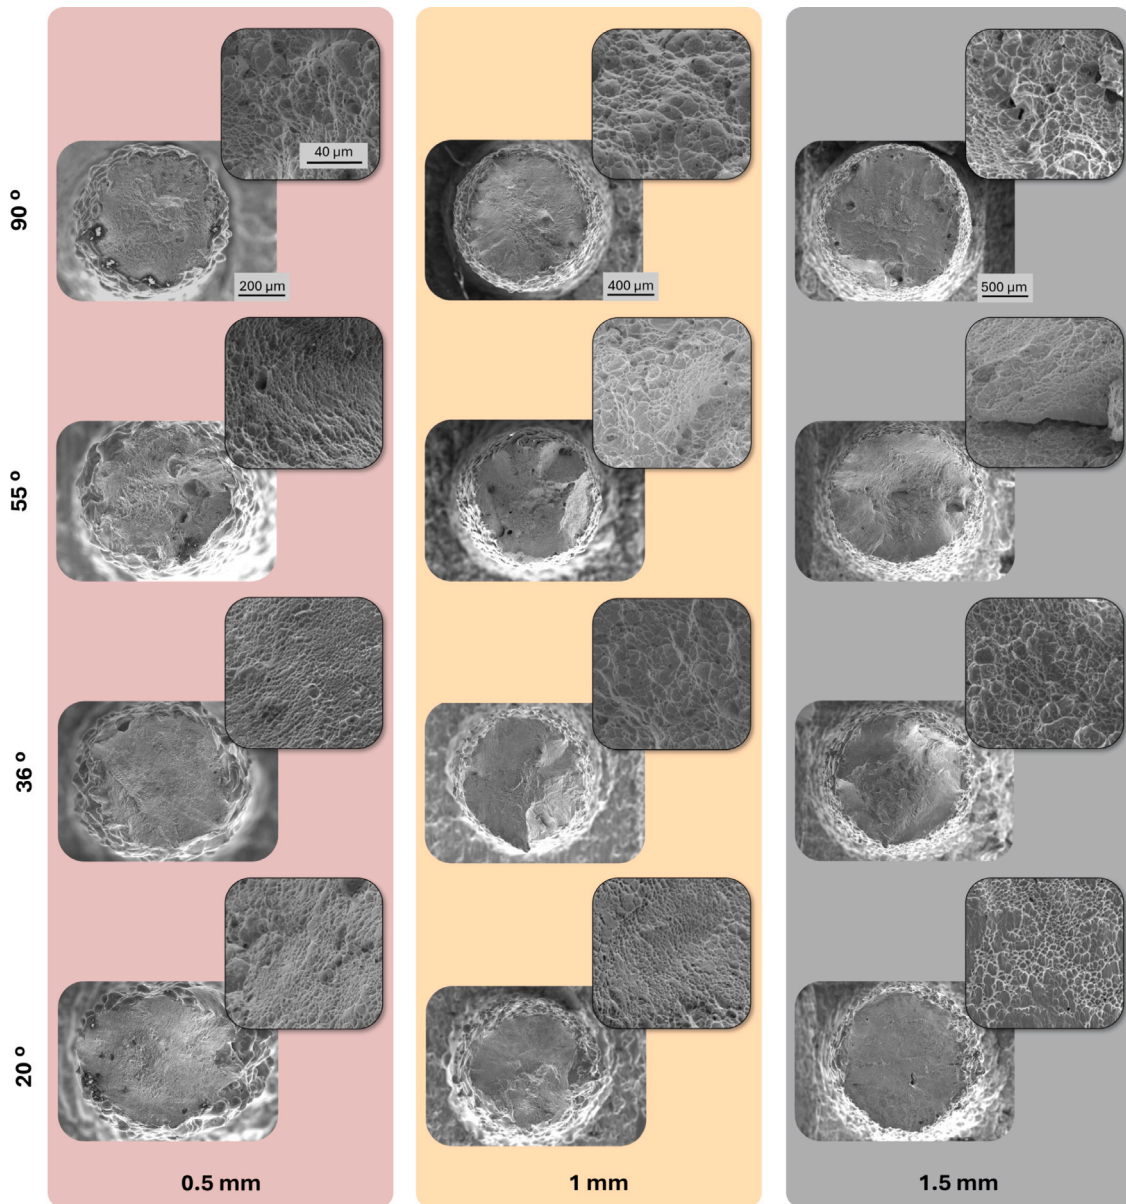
Fracture surfaces of representative tested specimens for different strut diameter and orientation conditions. Along with them, detail of the centre region of each fracture surface is presented for dimple analysis.
